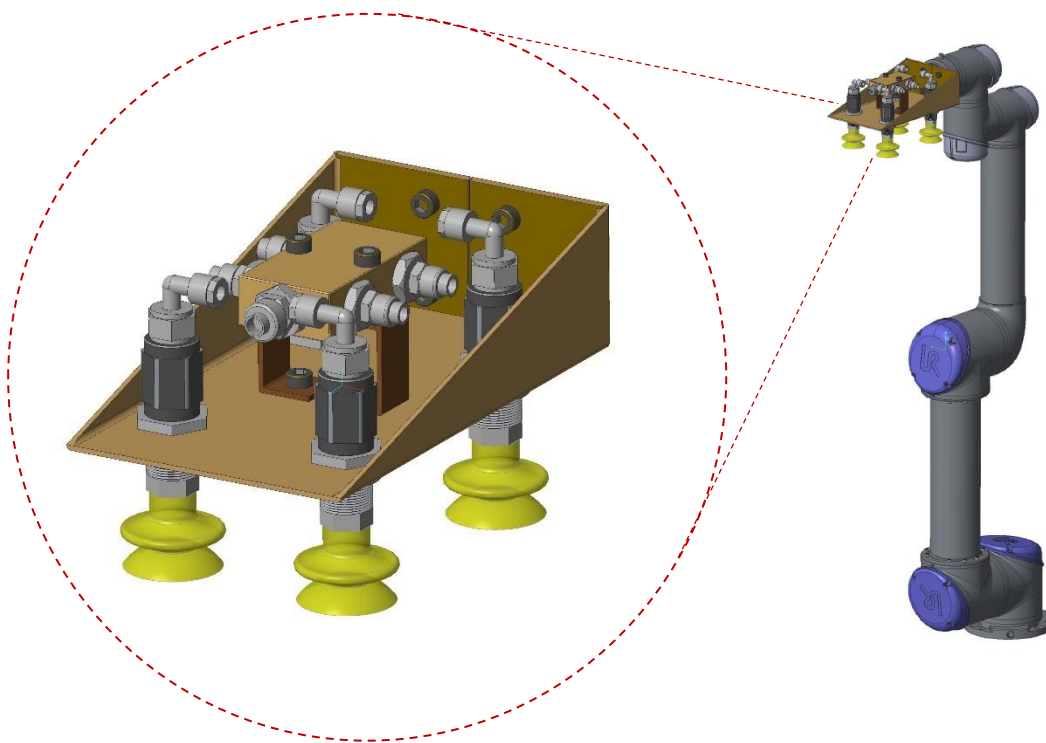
CAD Design of the Custom Vacuum Gripper
